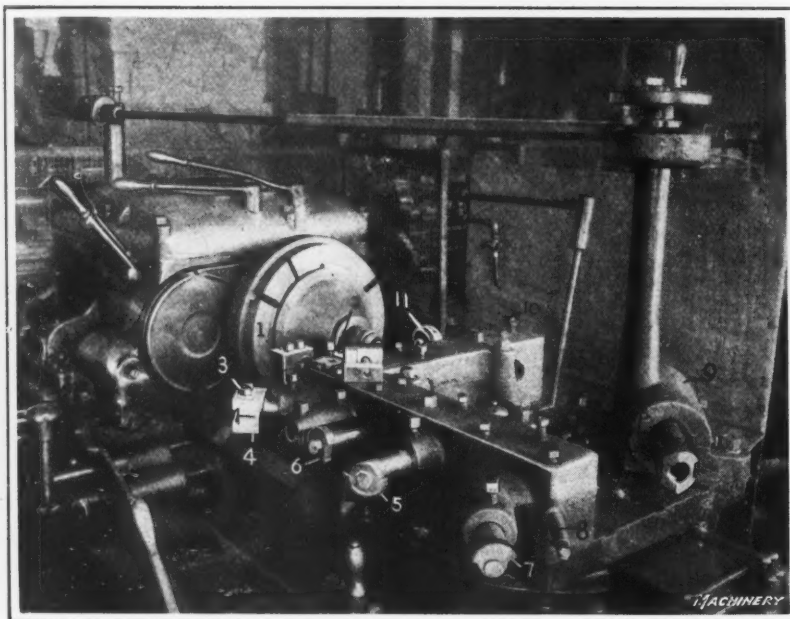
Turret Lathe equipped with Multiple Tool-holder for machining Exterior Surfaces of Cream Separator Bowls
